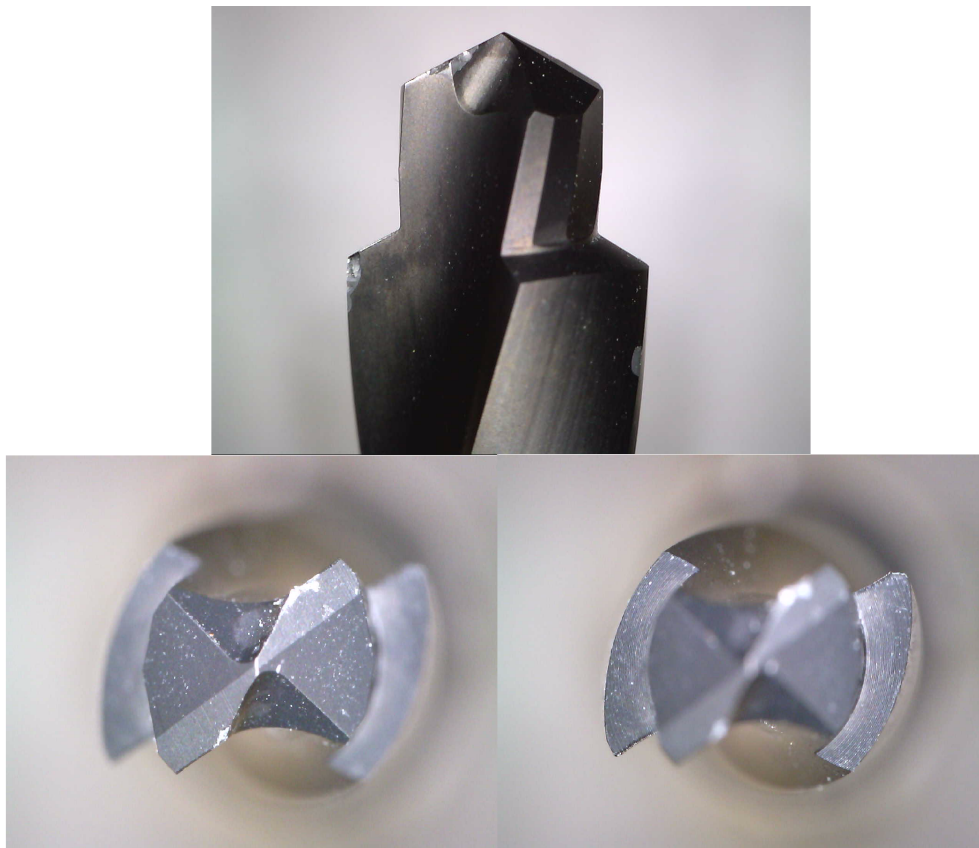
Tool wear after 110 holes (pneumatic machine) - Tool sample 1.
